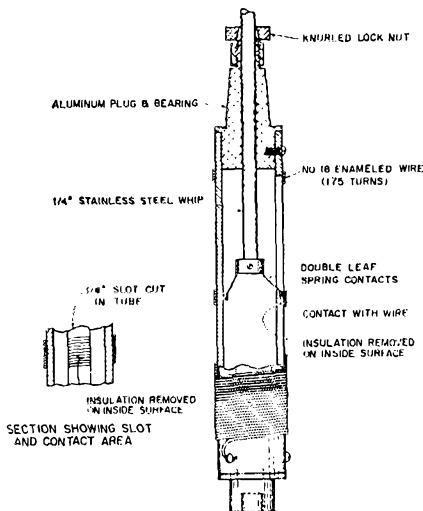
Cutaway drawing showing the constructional features of the loading coil. Dimensions can be varied to suit materials available.
